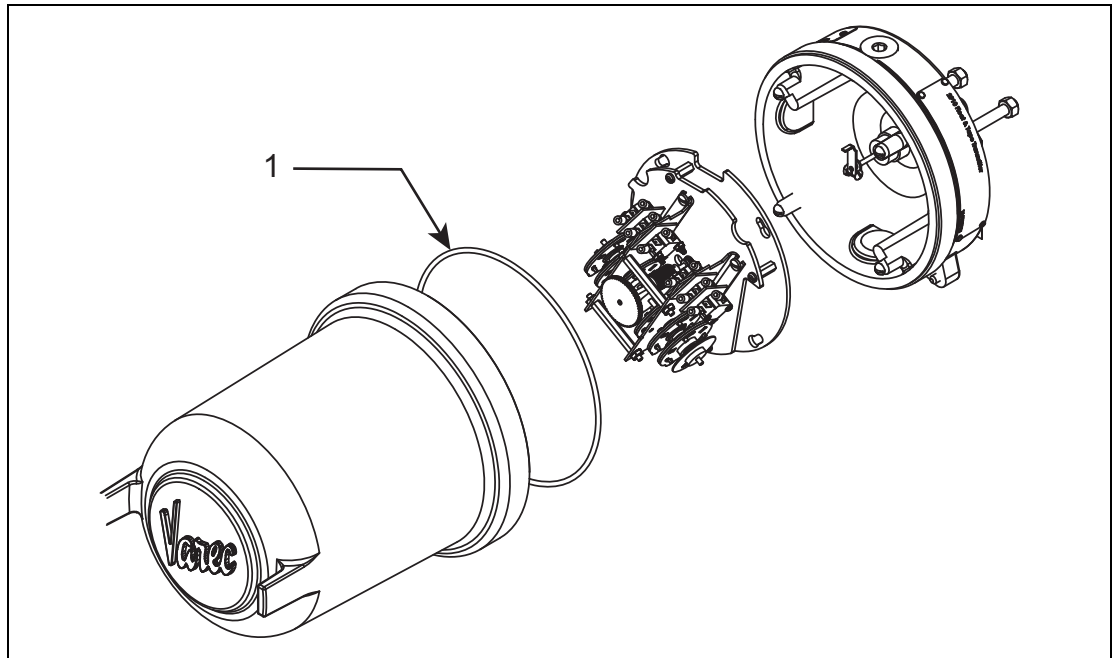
2910 FTT Exploded View — with Limit Switches Only
